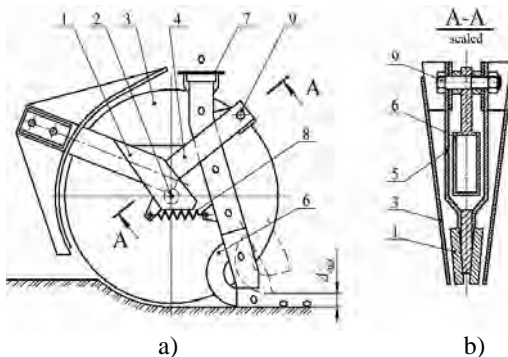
The design and technological scheme of the combined couler: a – side view; b – section A-A: 1 – body; 2 – axis; 3 – disc; 4 – holder; 5 – side plate; 6 – cylindrical seed drill tube; 7 – connecting element; 8 – spring; 9 – articulated suspension
